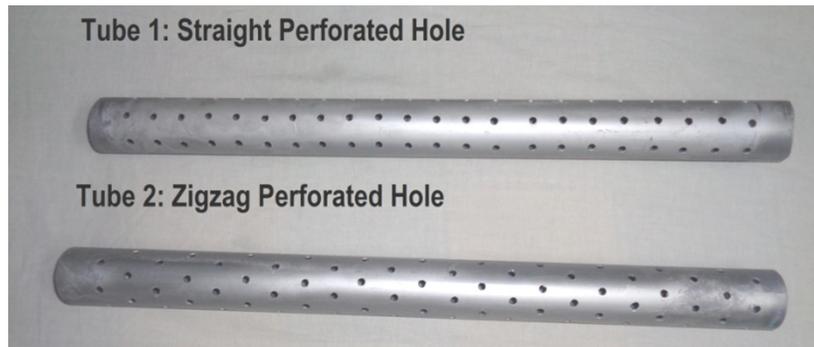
Pattern of hole on tube 1 (Straight) & tube 2 (Zigzag).
